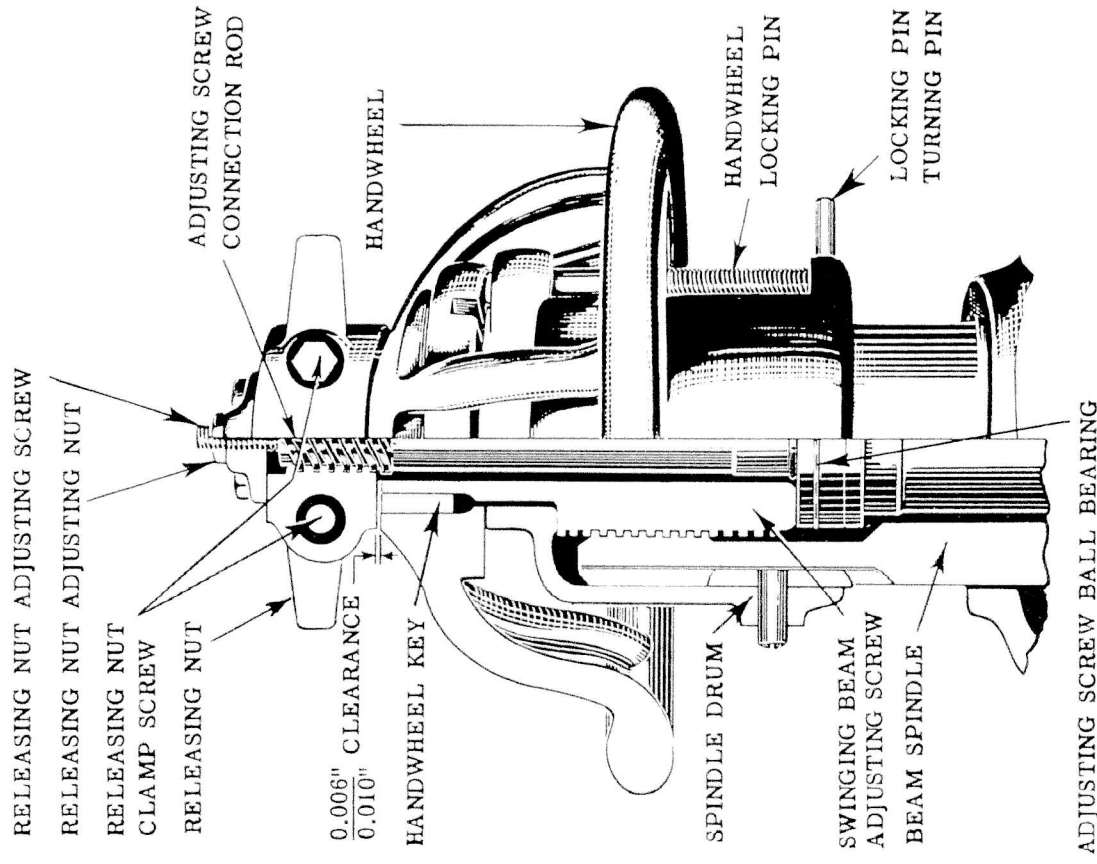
Upper Beam Spindle Parts-Cutaway View
